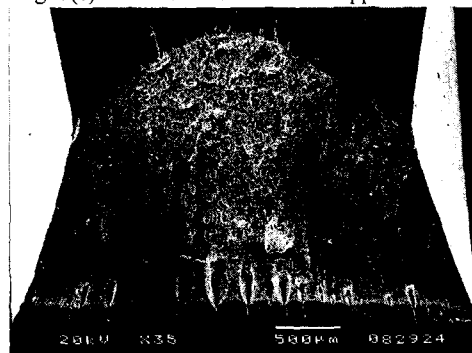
(d) Fracture Surface of 100 ppm H at 300°C
